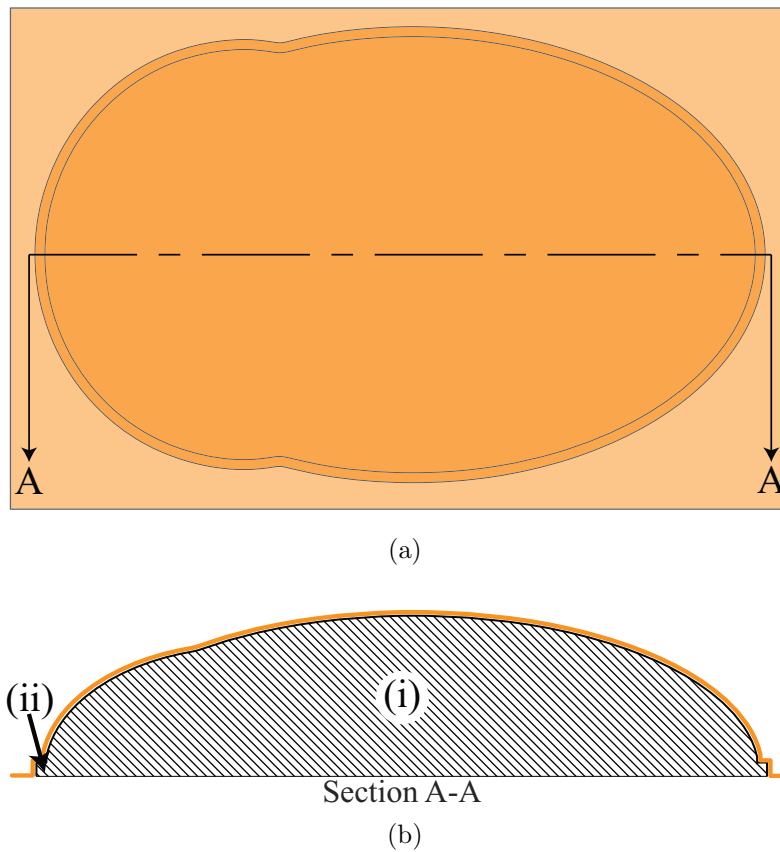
(a) Top view and (b) side section view of the thermoformed structural top shell over a 3D printed mold. (i) 3D printed PLA plastic ellipsoidal form with a 3 mm hull and 30% fill. (ii) Outwardly protruding lip at the base.
